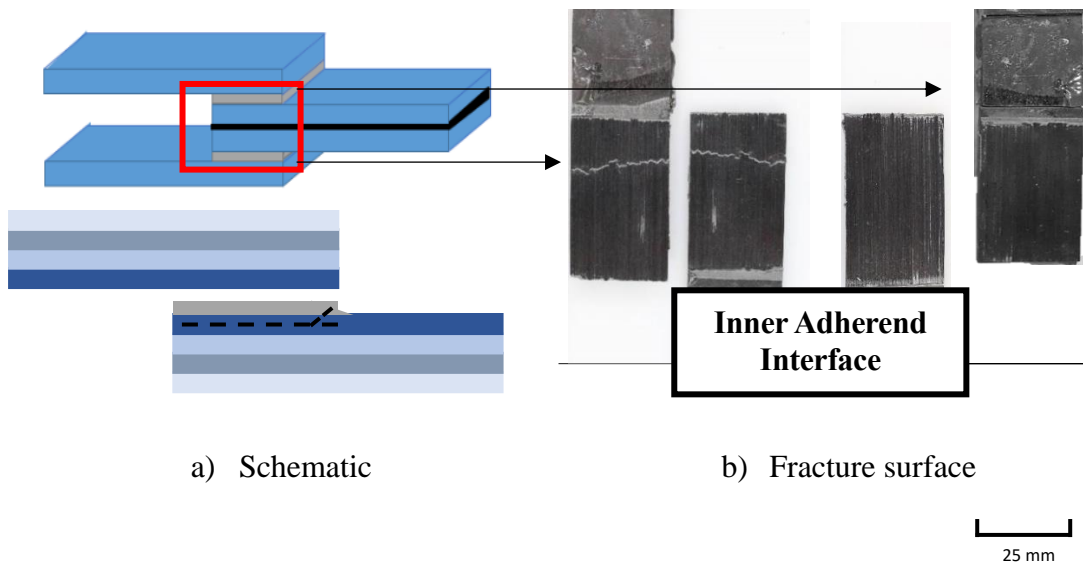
Failure schematic and fracture surface for grit blasted DLJ specimen.
